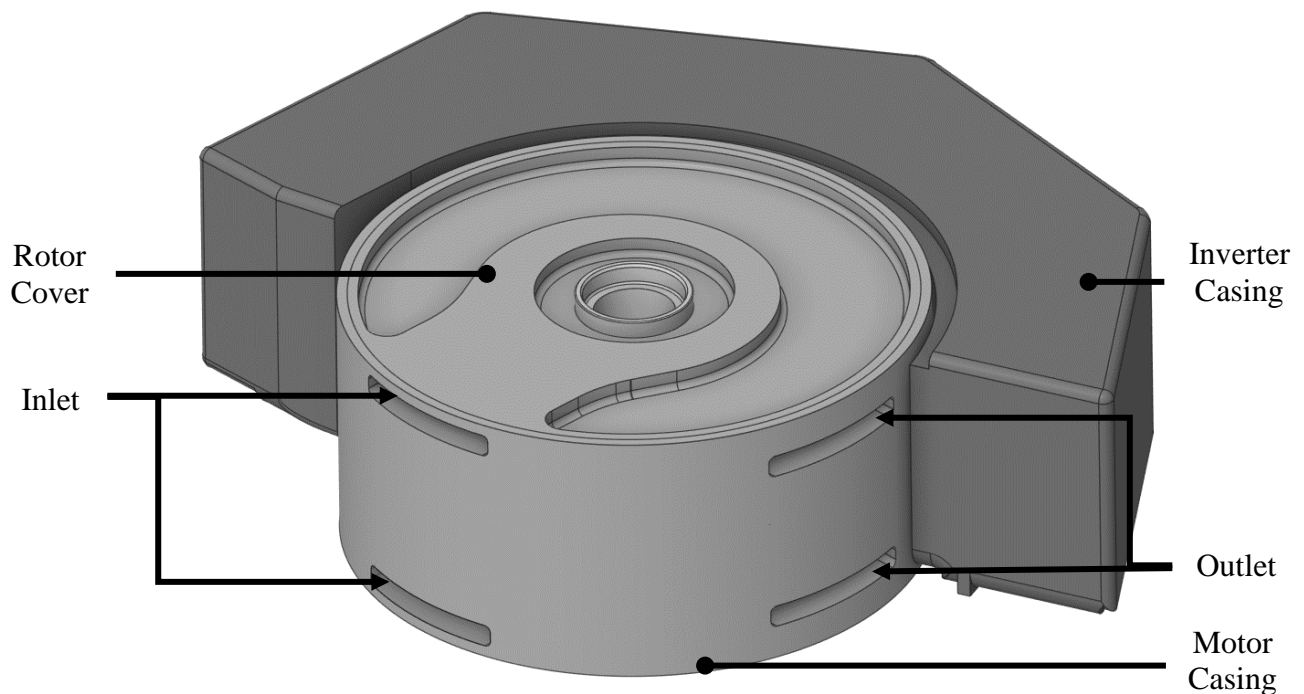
Representation of the external view of the machine assembly with the initial enclosure design.
